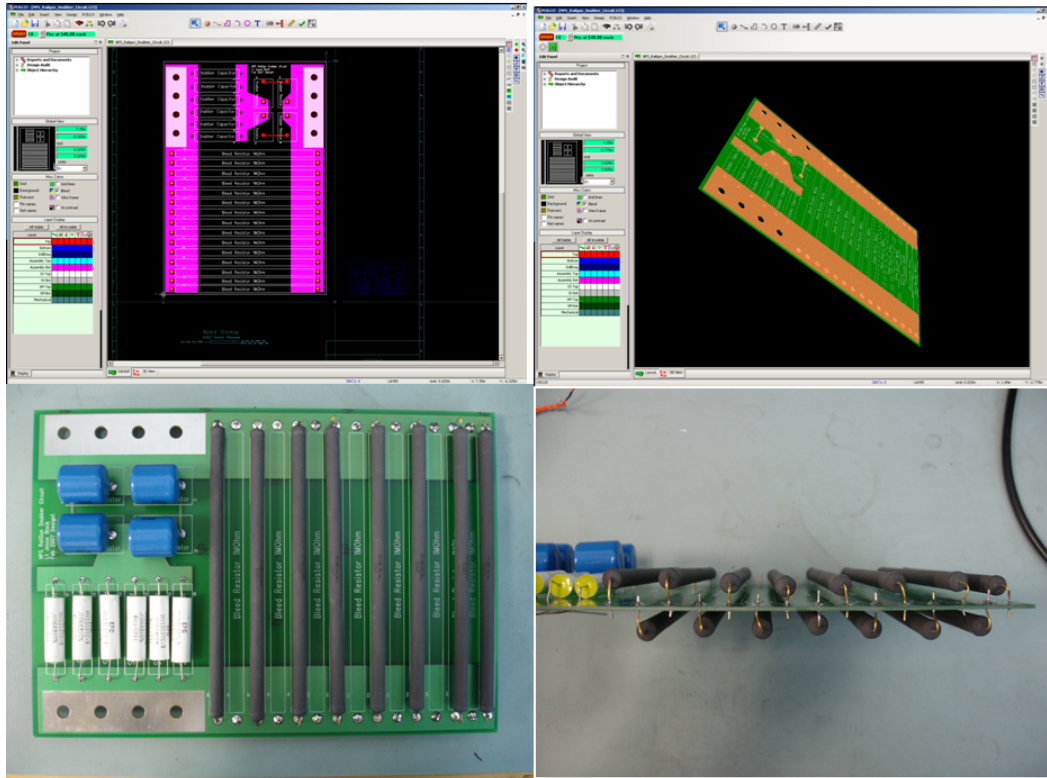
Snubber circuit pictures from top left moving clockwise. PCB123 board layout, PCB123 3-D View, Side view, Top View.
